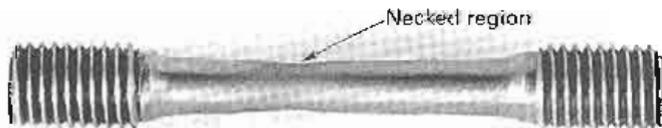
A standard 0.505-in.-diameter tensile specimen showing a necked region developed prior to failure.
